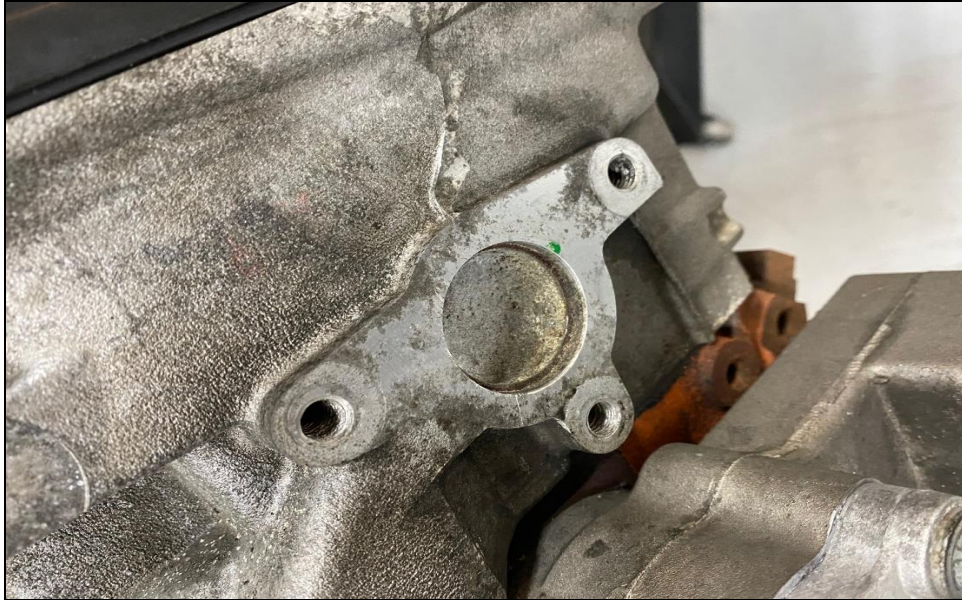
Gen III Hemi Power Steering Pump Mounting Surface
